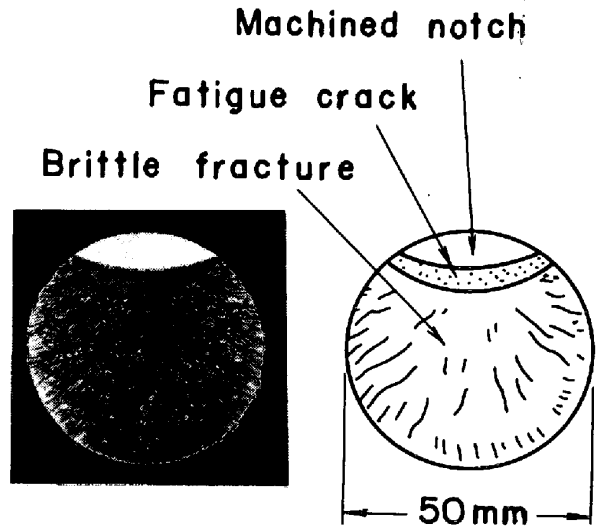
Example of fracture surface (SCM 440, D=50 mm, $a/D=0.25$).
